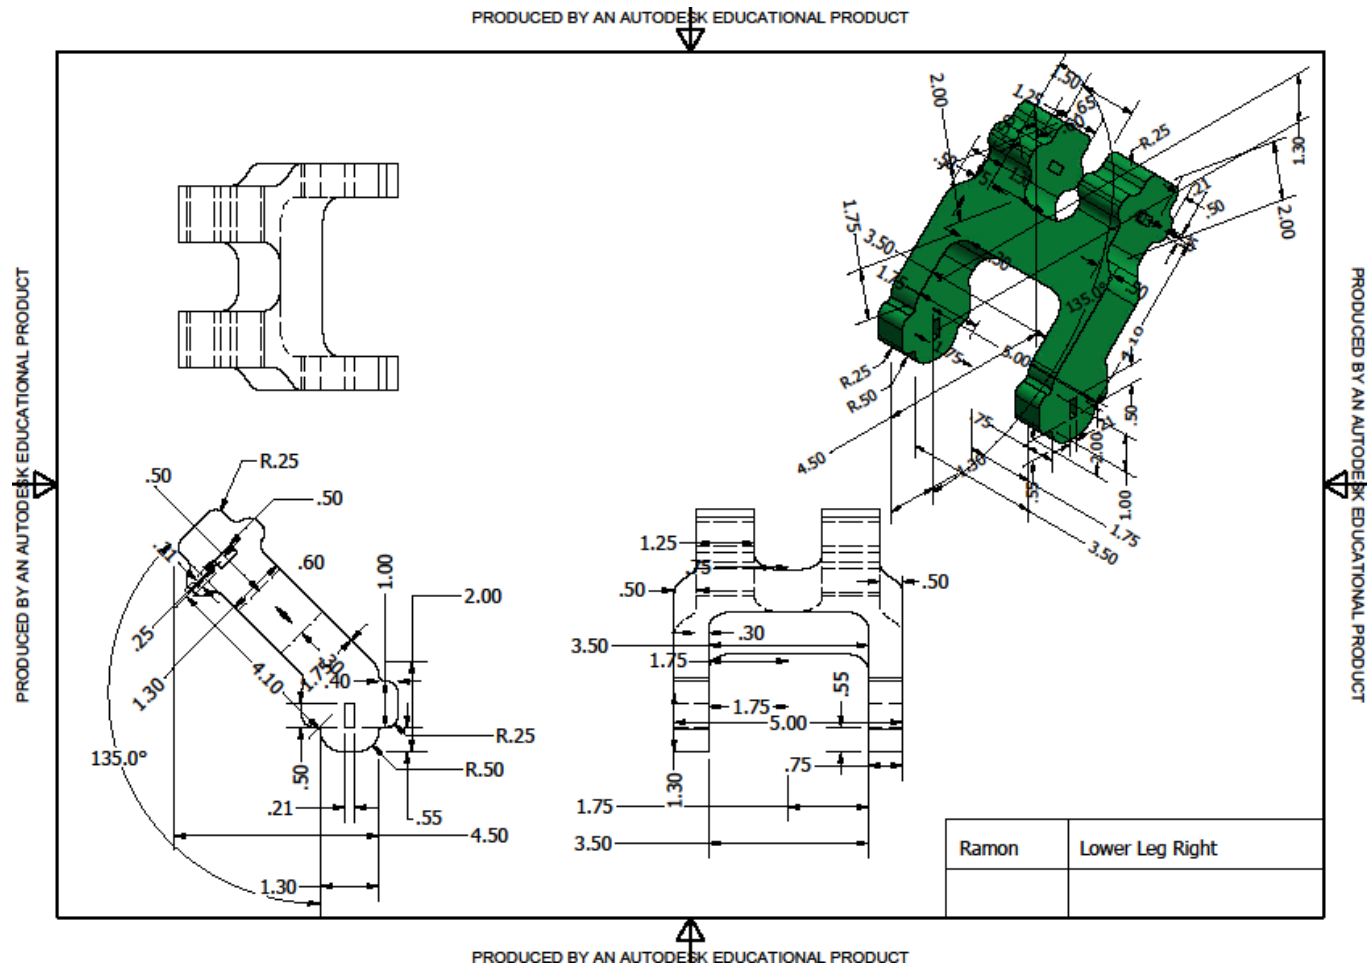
CAD drawing of the Lower Right Leg of the 6-DOF sensor.
